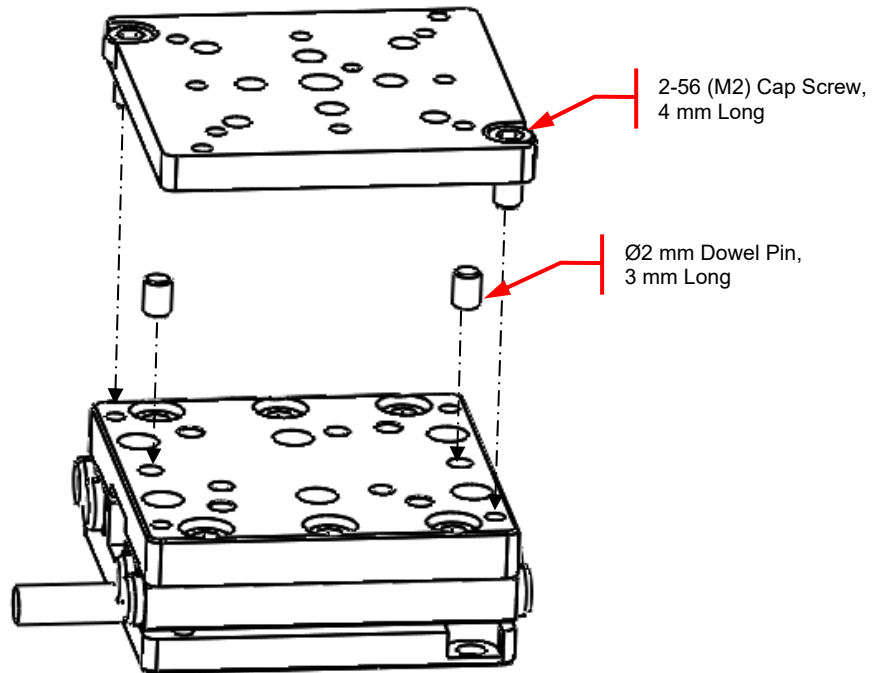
Mounting Adapter PD1U(M) on Moving Platform
